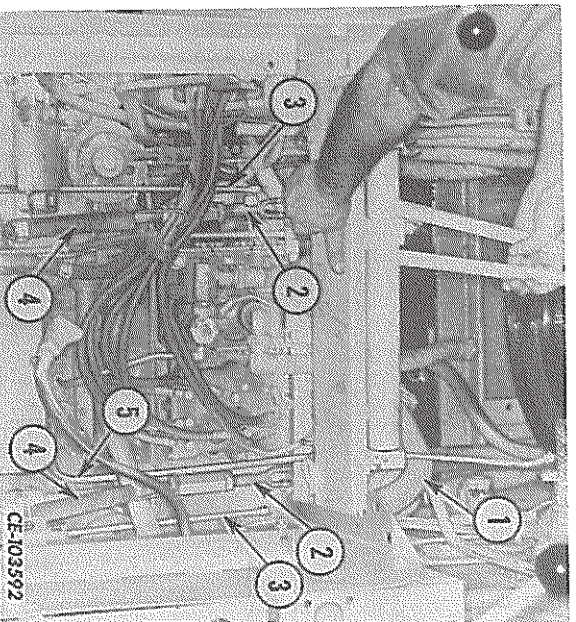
Removing the Platform Support Bar With Steering Levers
